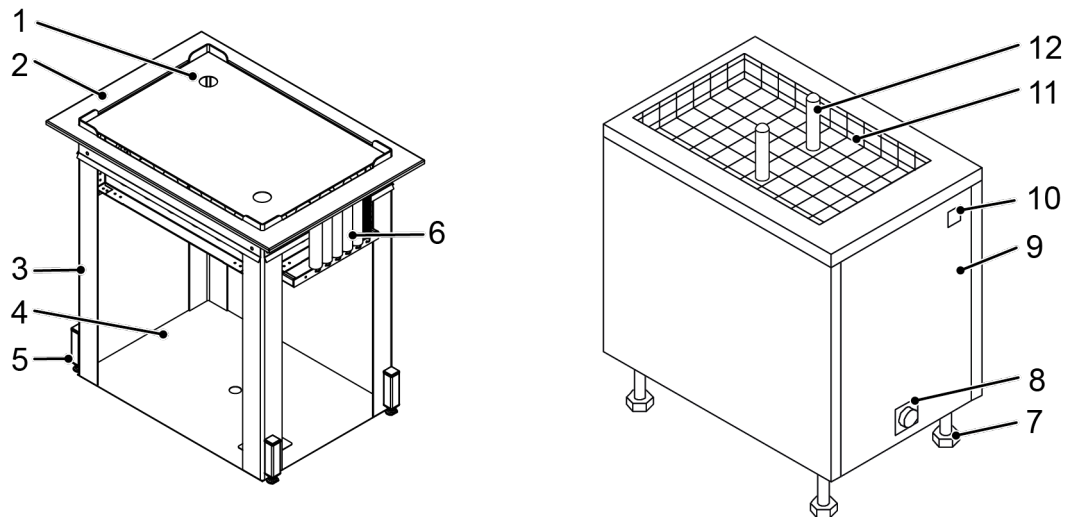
Example of a tray dispenser and an incounter universal dispenser, heatable
